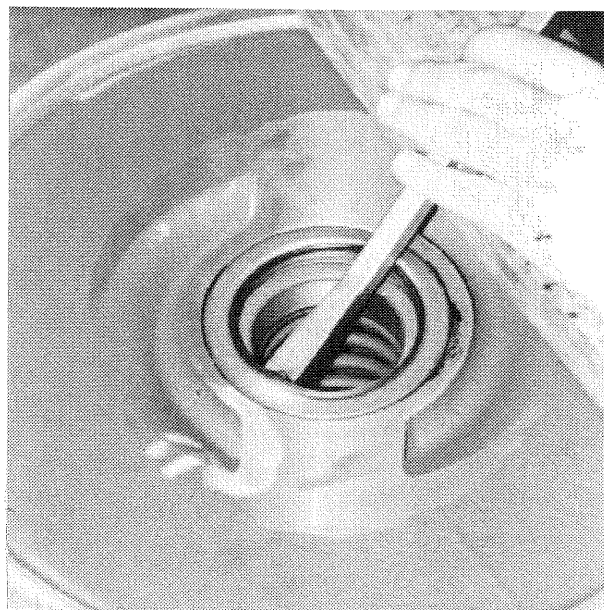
Removal of Drum & Shaft, and Ring Gear (2 of 4)
